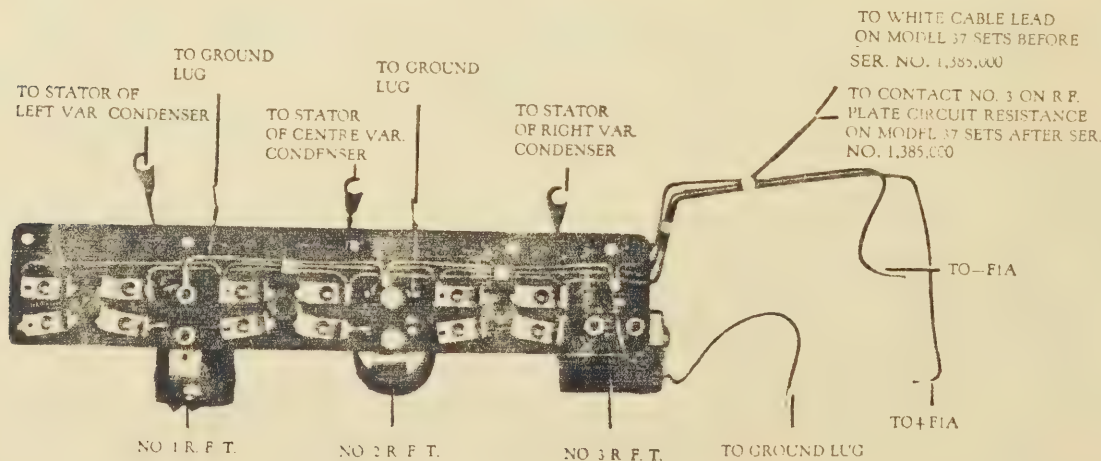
VIEW OF R.F. AMPLIFIER, SHOWING WHERE EACH WIRE IS TO BE CONNECTED.
